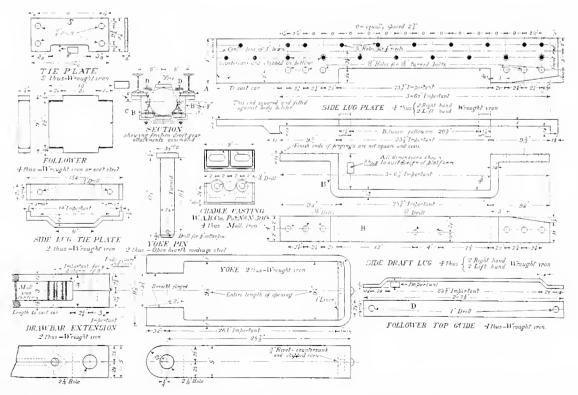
Westinghouse Friction Draft Gear. Forging Attachment for Passenger Equipment Cars with Standard Steel Platforms and National Couplers. Westinghouse Air Brake Co. (280)
